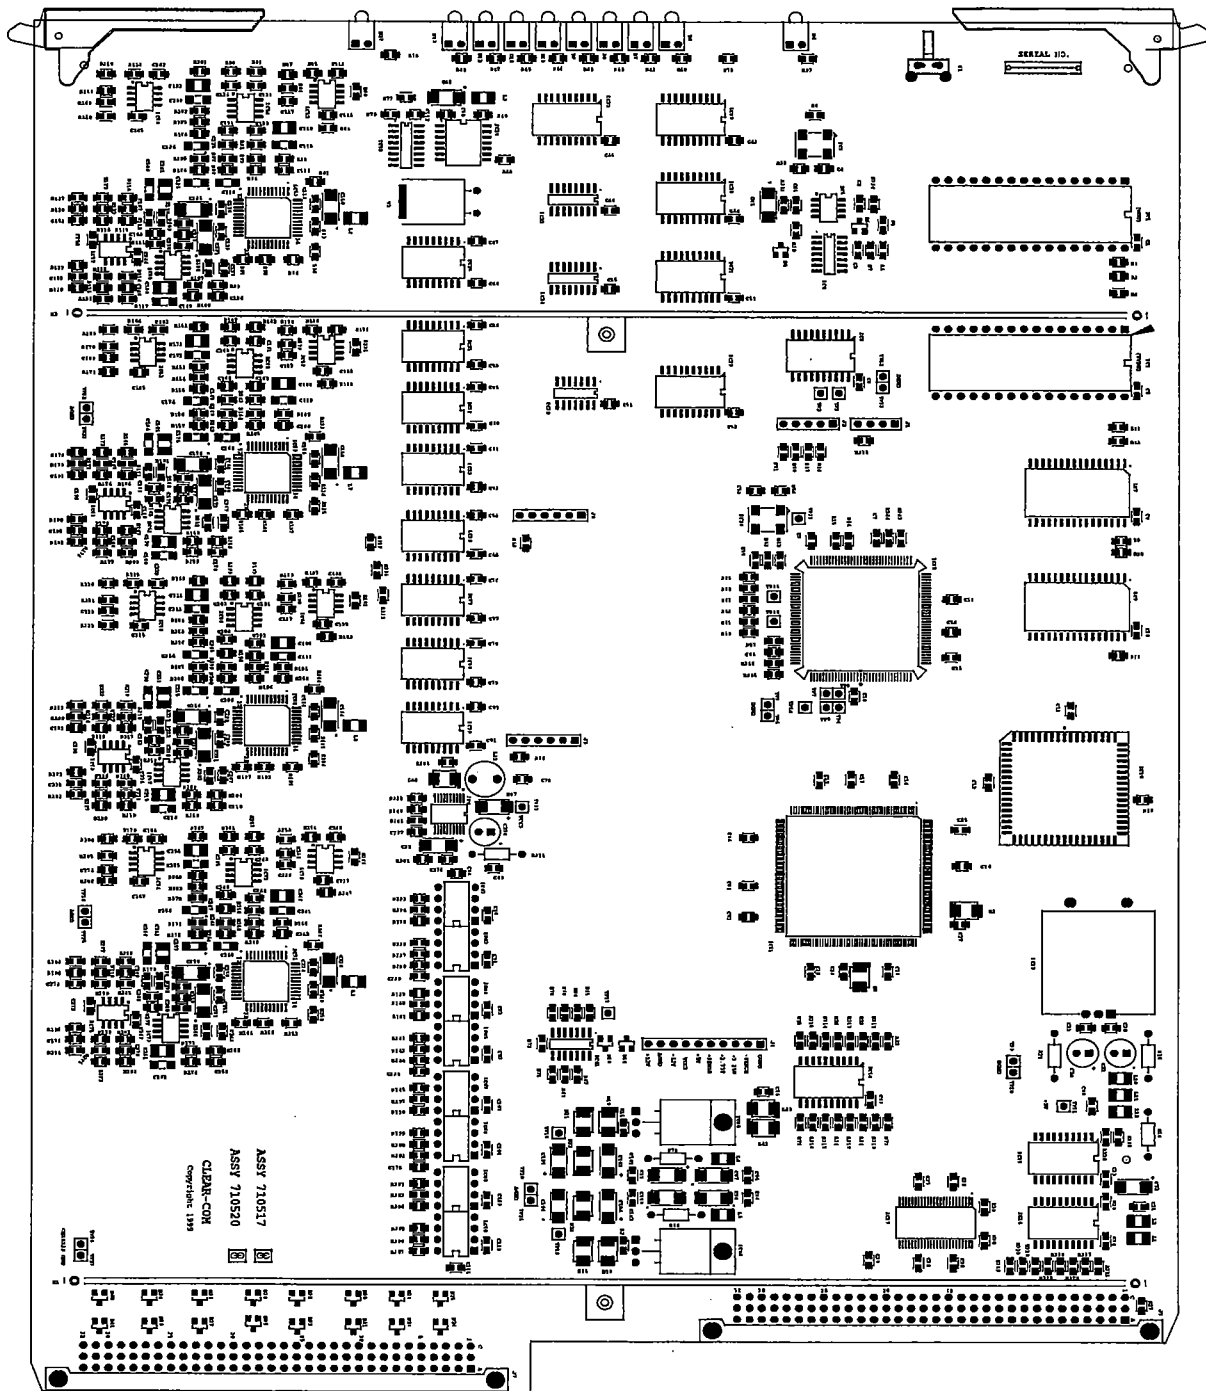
Assembly Drawing—MVX-A8/L8 PCB, Rev. A
